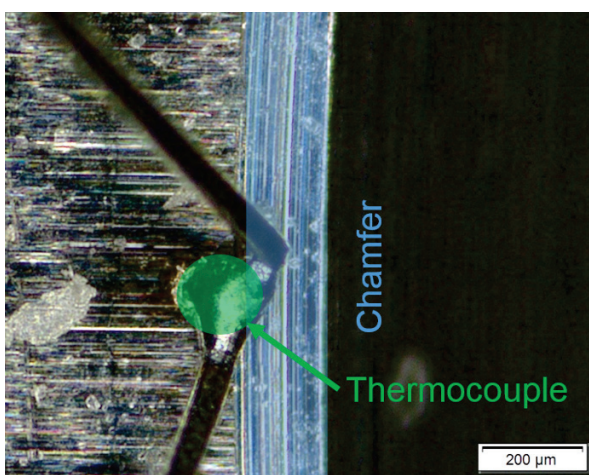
Optical microscope top view image of a welded thermocouple. The contact area of the thermocouple is marked green whereas the chamfer is illustrated in blue.
